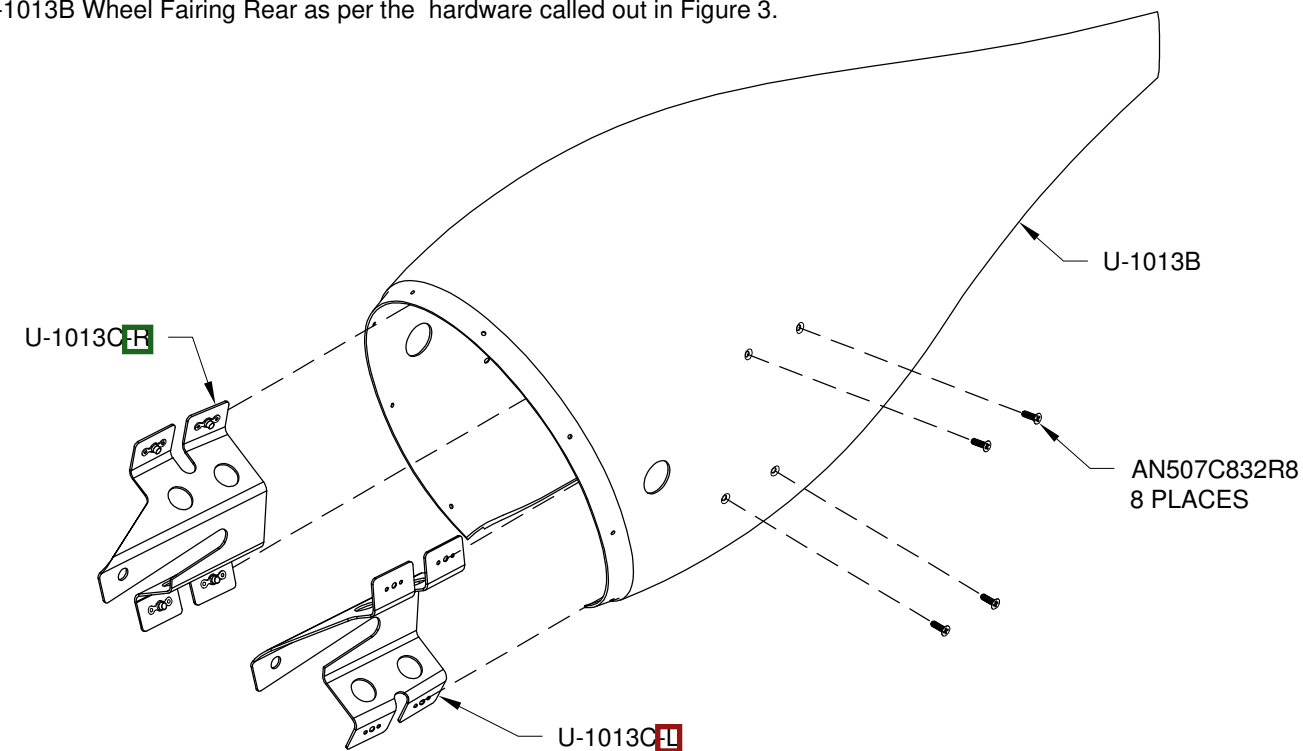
FINAL DRILLING THE FAIRING AND COUNTERSINKING
